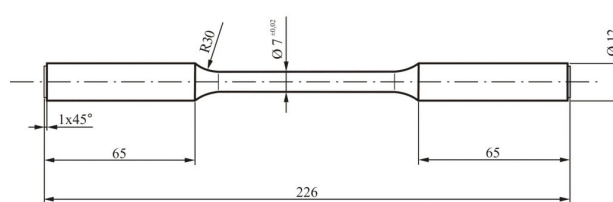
Shape and dimensions of samples used in the fatigue test on the device ROTOFLEX.
